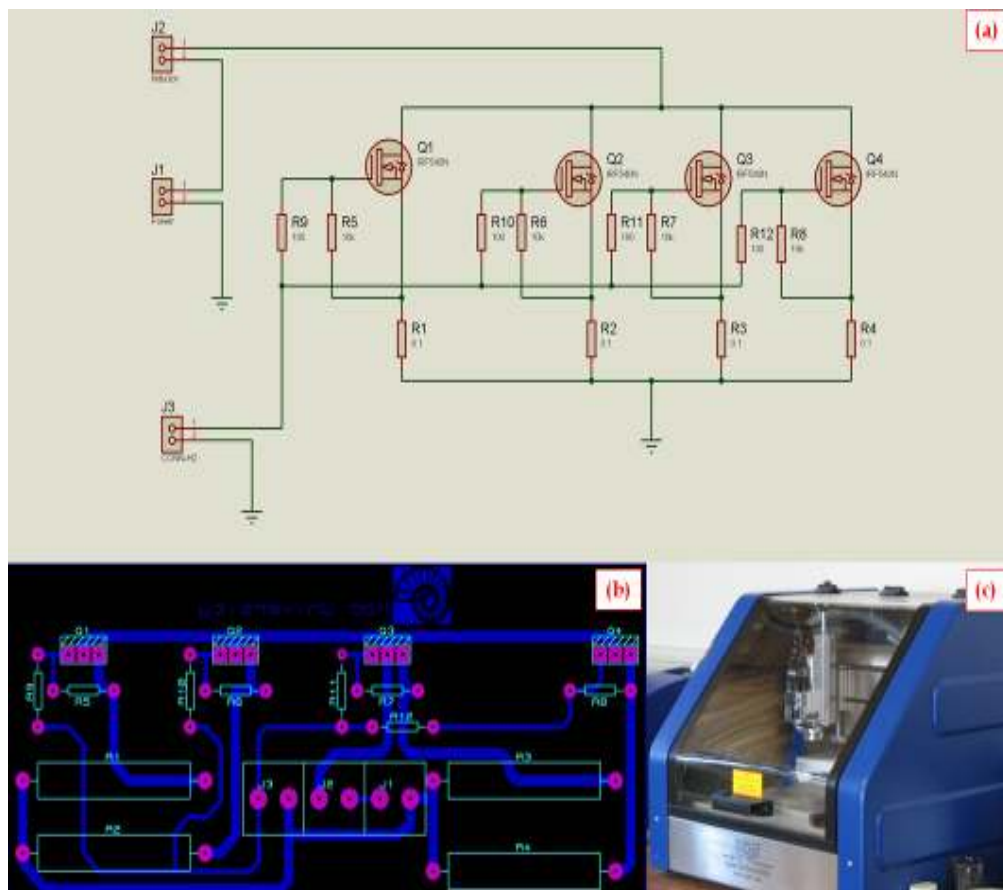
(a) Proteus (Isis) circuit schematic drawing (b) Proteus (Ares) pcb drawing (c) LPKF S62 PCB Machine
